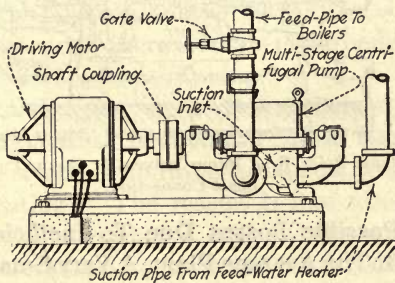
Centrifugal Boiler-Feed Pump Motor-Driven Through Direct Shaft Connection.
